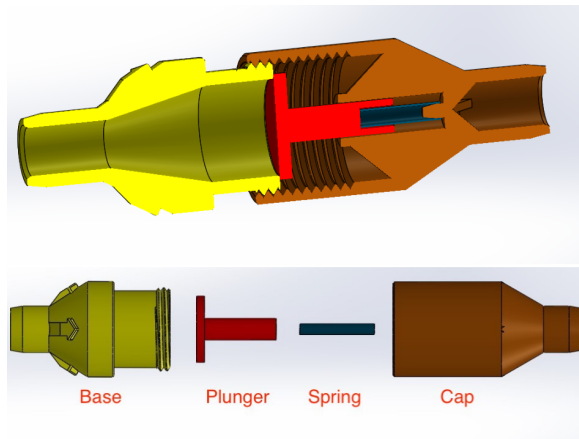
Top panel: Cross-section of RMT device. Valve body (yellow), valve plunger (red), spring (dark blue), cap (brown). Left port can be used for expiration training, right port for inspiration training. By rotating the valve body with respect to the valve cap the preset threshold pressure changes. Bottom
